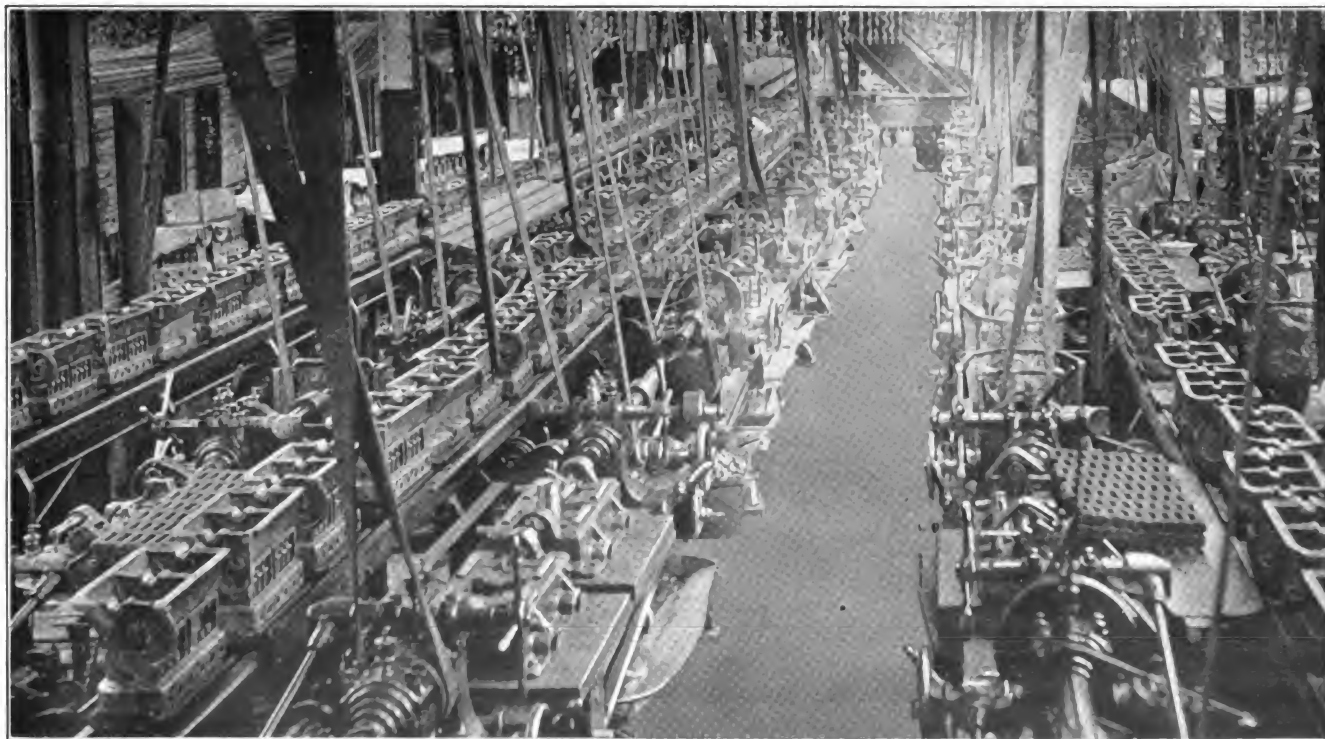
Group of machines necessary in line-reaming the main bearings.
